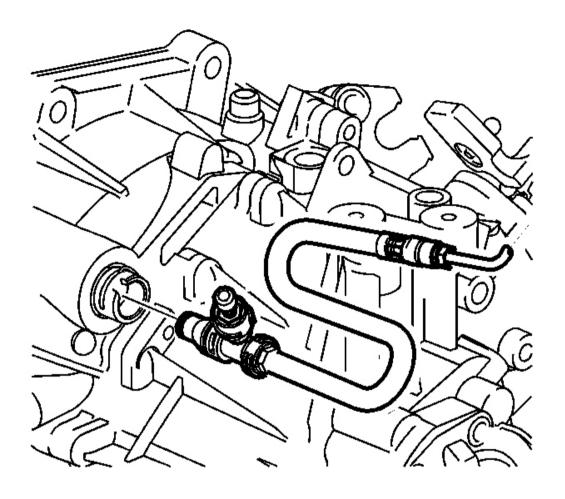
Pressure Line & Clutch Actuator Cylinder Courtesy of GENERAL MOTORS CORP.
